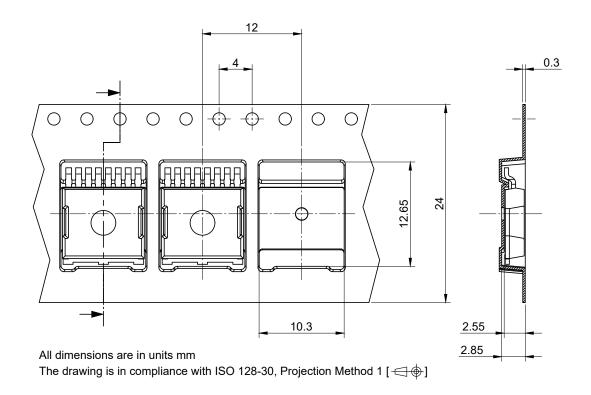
Outline Tape (PG-HSOG-8), dimensions in mm
